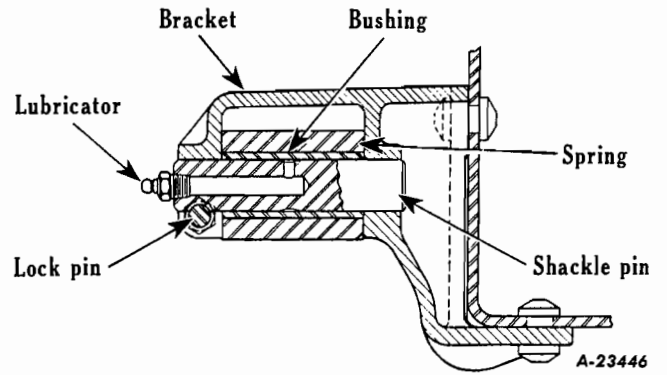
Rear Spring Front Bracket For Models L-150, L-153.
